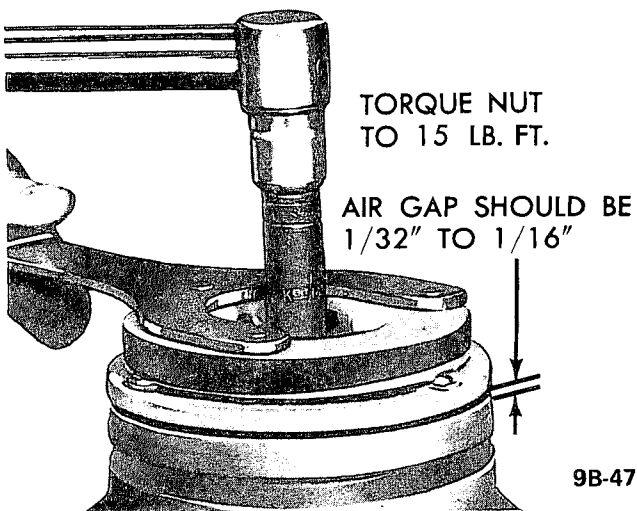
B-71 Torquing Shaft Nut - 6 Cylinder Compressor
